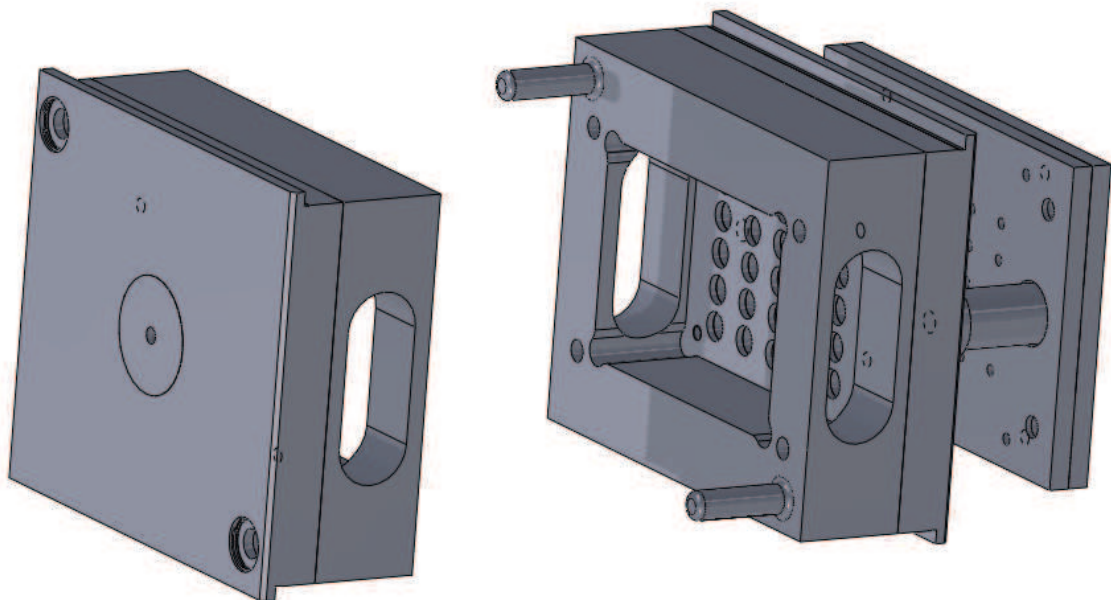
The MUD base used to house the completed mold inserts for molding in the injection molding machine.
